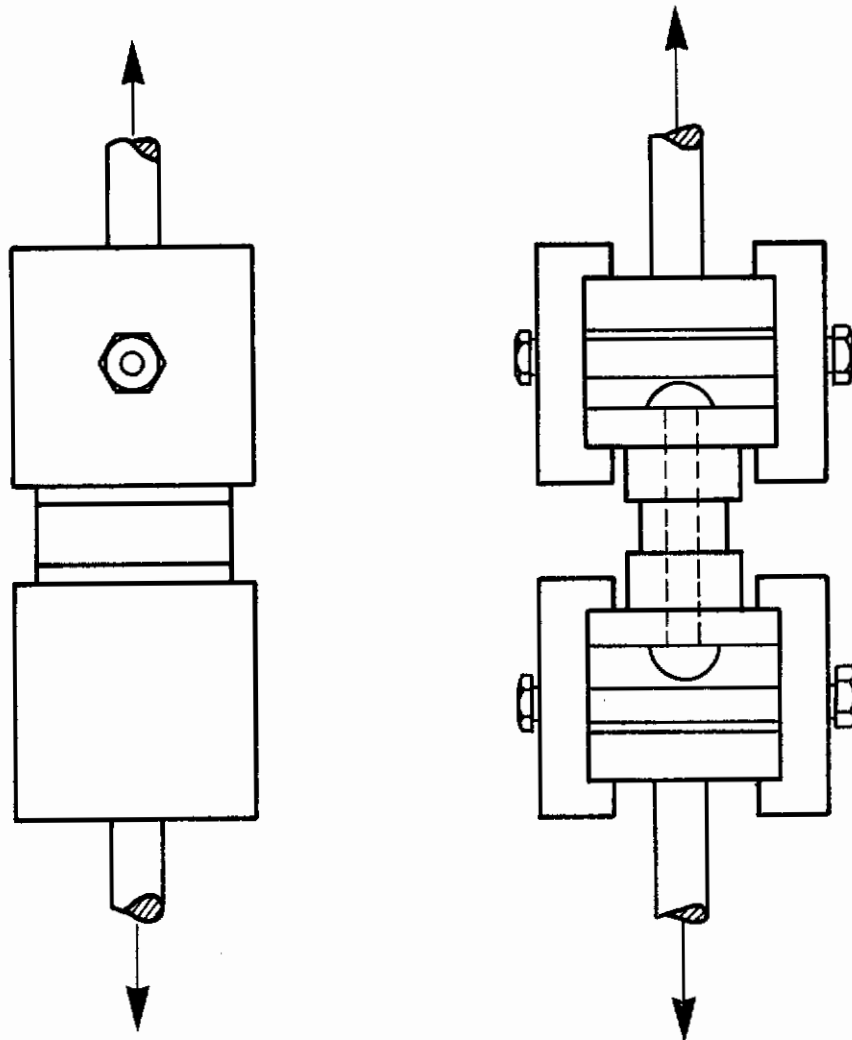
TEST FIXTURE USED BY WILSON (6.74) FOR STUDYING INITIAL TENSION IN RIVETS
